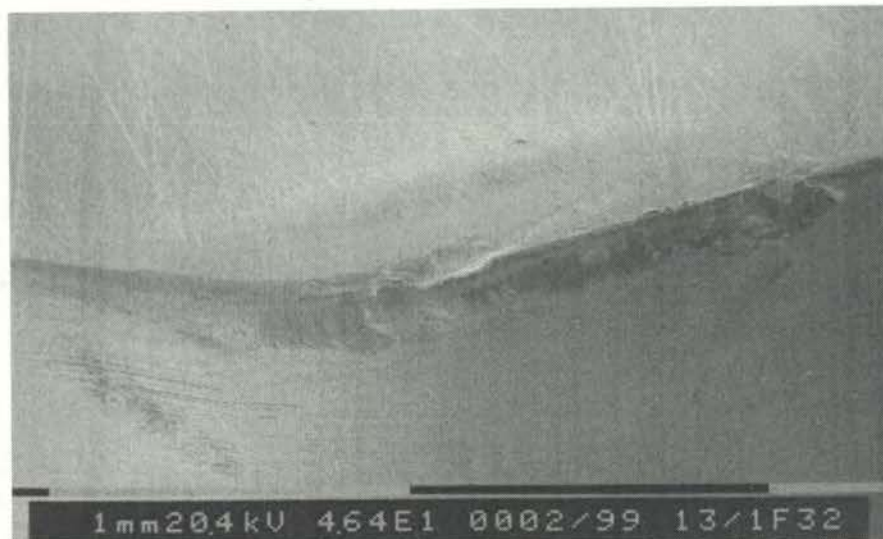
39 A general view of KMF tool failed due to progressive chipping/plucking, workpiece adhesion and smooth flank wear after cutting Inconel 718 for 32 minutes at 25 m/min and 0.08 mm/tooth
